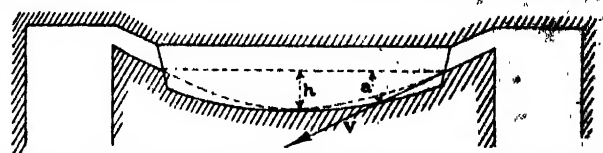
The Inverted Parabola of a Flame in Making Bottom.
